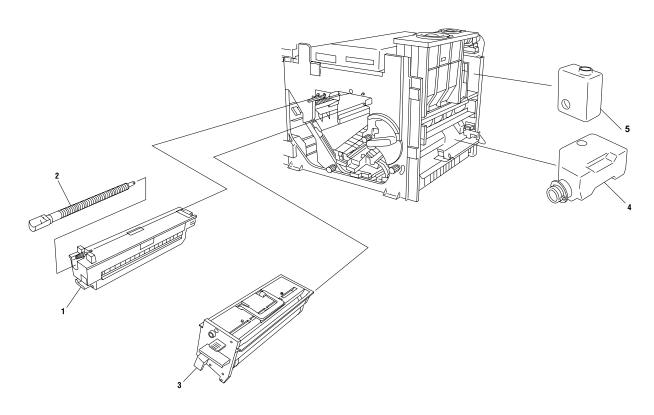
Fuser and Drum Unit Parts Locational Diagram
